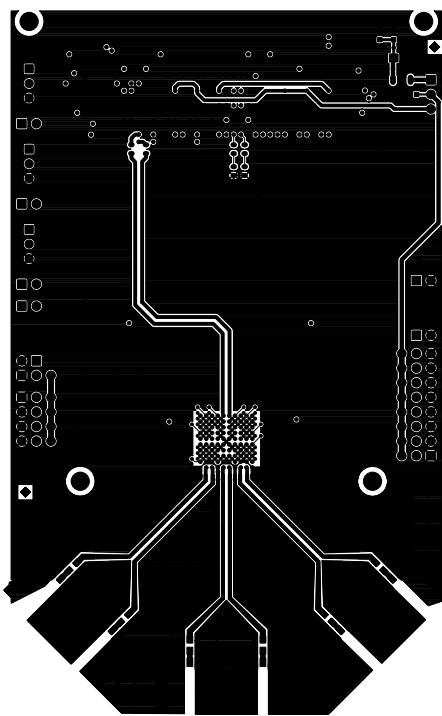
Si5110-EVB Layer 1—Component Side (Daughter Card)
